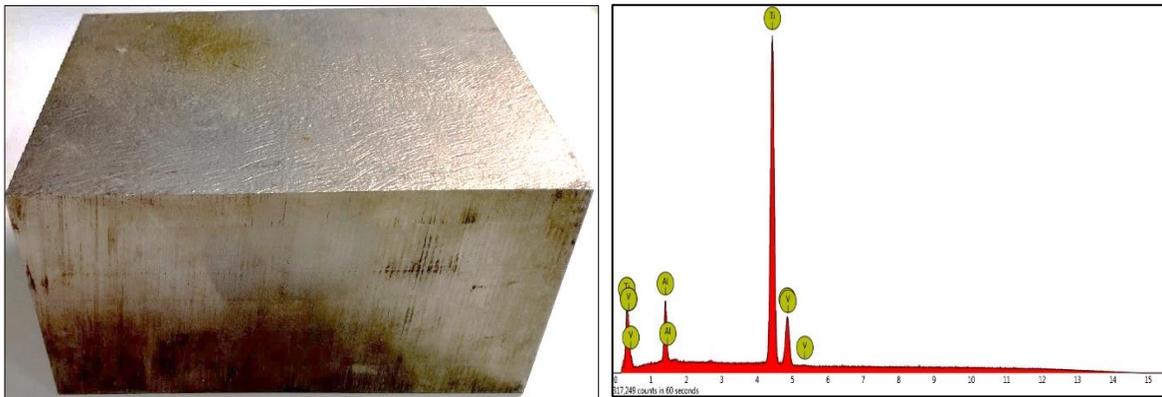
(a) The workpiece sample prepared for milling process (b) EDS analysis of the workpiece
